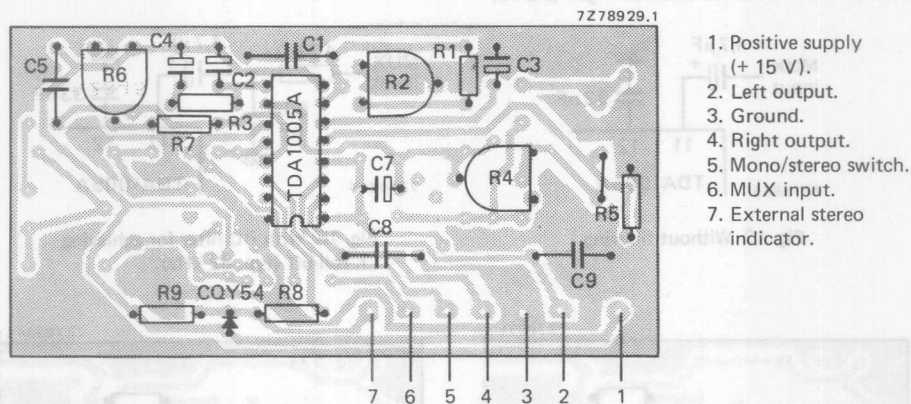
Printed-circuit board component side of a t.d.m. decoder, showing component layout. For circuit diagram see Fig. 10.
